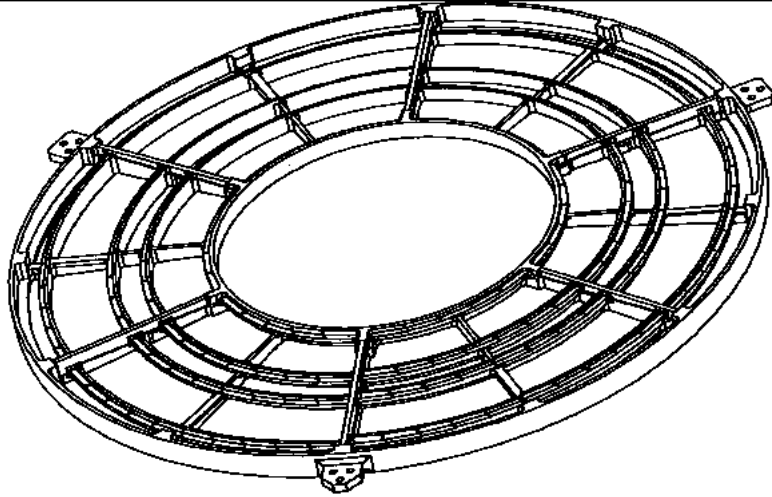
LETG Grating Element Support Structure, a machined aluminum plate approximately 110 cm in diameter that holds grating modules on a Rowland torus behind the *Chandra* mirrors.
